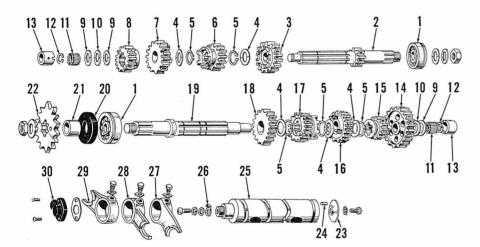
Exploded view of the transmission assembly. Shift forks (28 & 29) are interchangeable.
